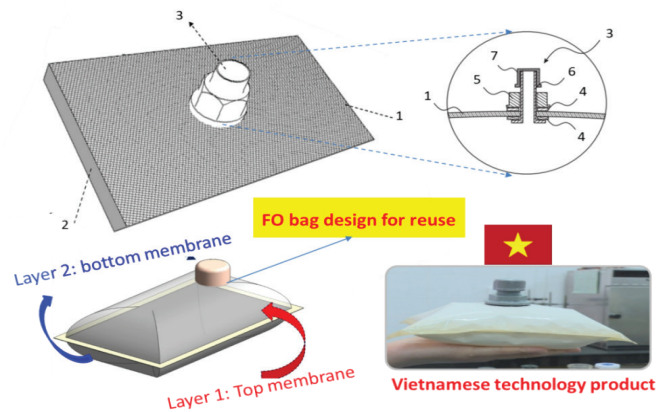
Forward osmosis bag design for reuse. 1. Top membrane; 2. Bottom membrane; 3. Connecting component for inputting and outputting the solution; 4. Rubber gasket; 5. Bolt; 6. Flange; 7. Cap.
